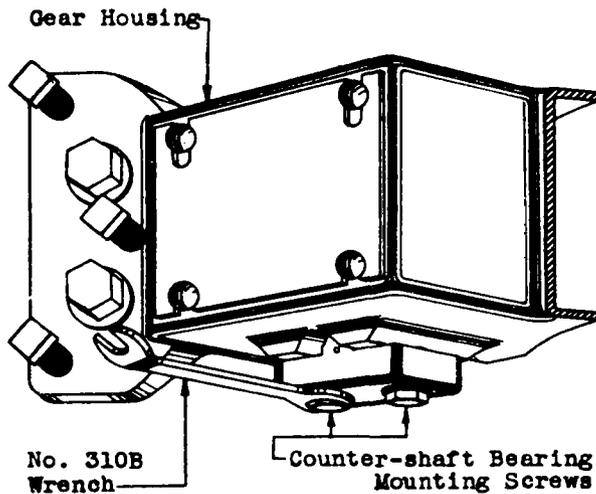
Adjustment of Counter-shaft Bracket to Obtain Minimum Back-lash Between Gears on 161 Type Interrupters
